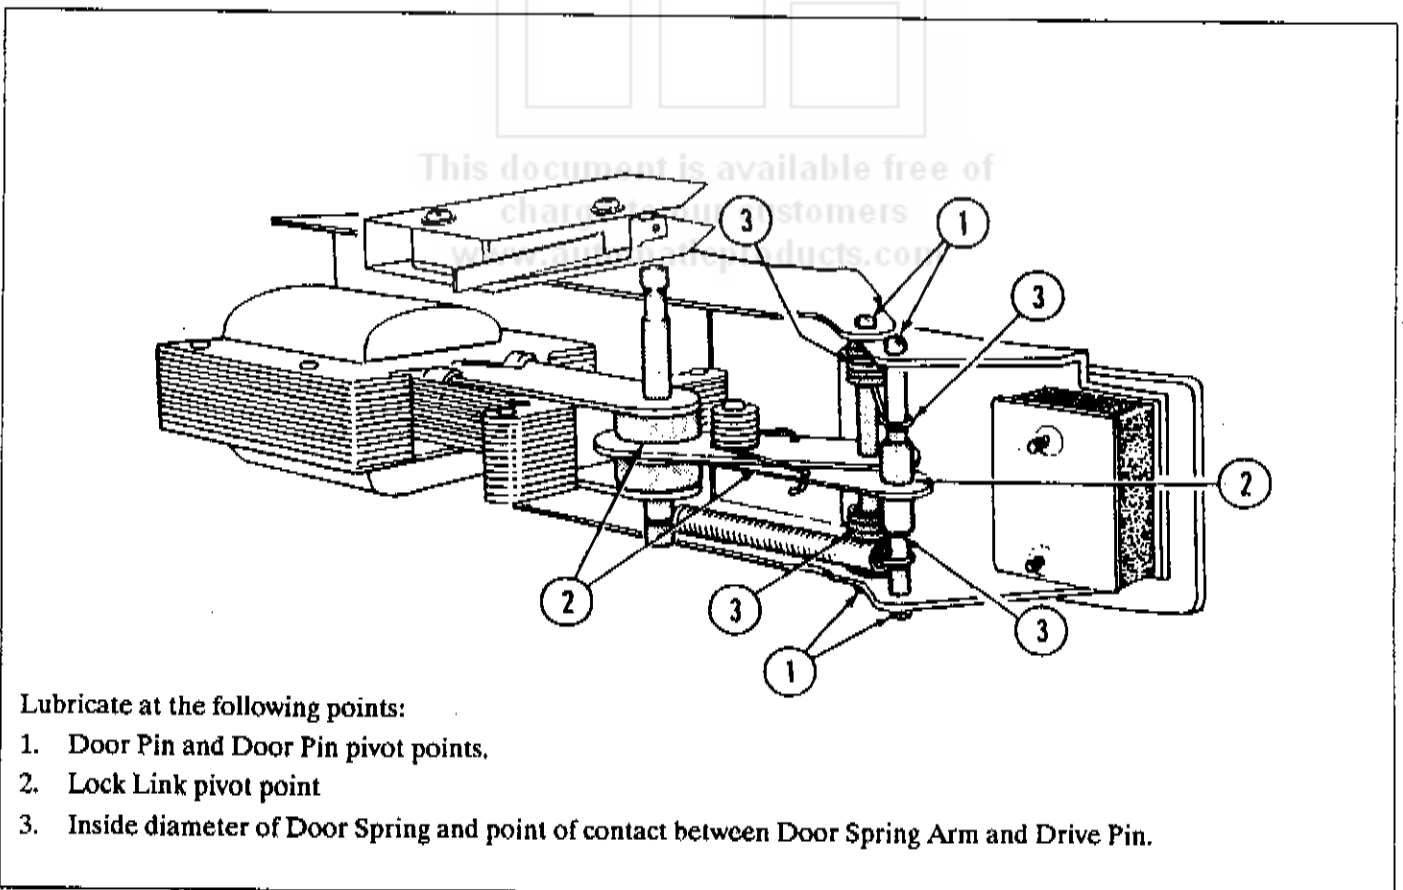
3 LUBRICATION OF DOOR MECHANISM
